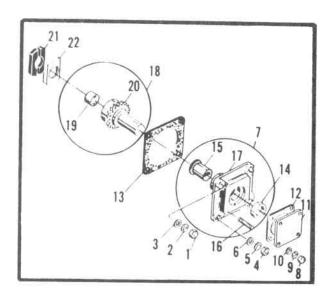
MAGNETO & ACCESSORY DRIVES
